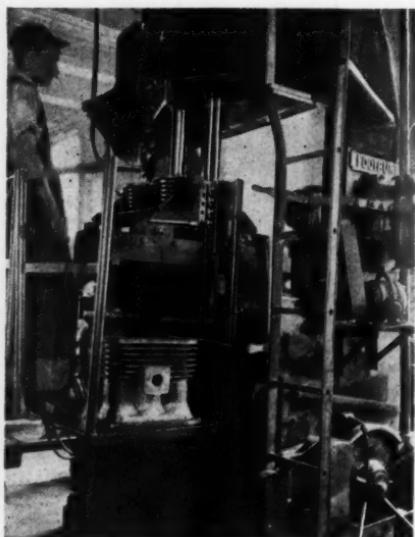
Using a Footburtt Vertical Boring Machine to bore the cylinders for an air conditioning unit.
